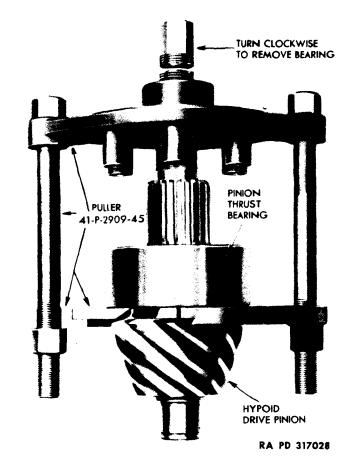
Removing Hypoid Pinion Thrust Bearing
